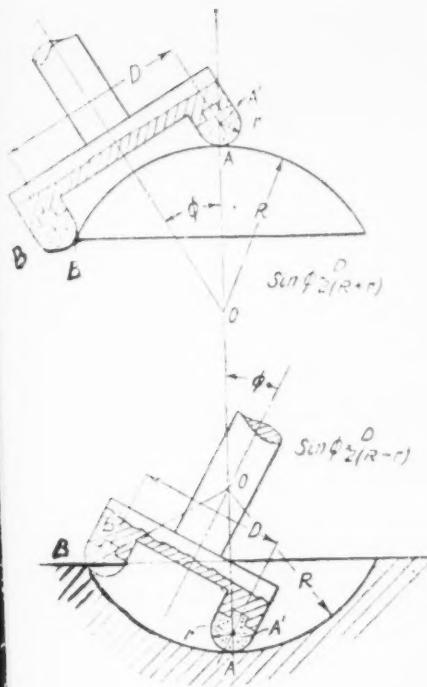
Principle of generating spherical lens blanks. (a) convex, (b) concave.
